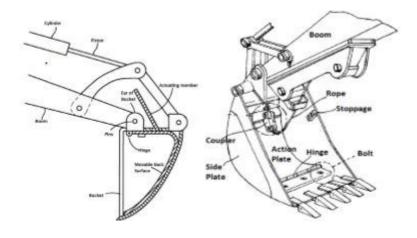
Working mechanism Fig.2 Self-cleaning mechanism
